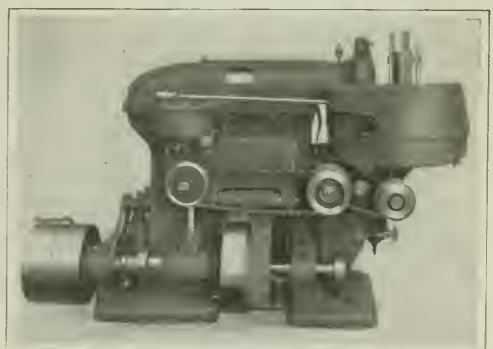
Rear View of Grinding Machine, showing the Main Driving Shaft
